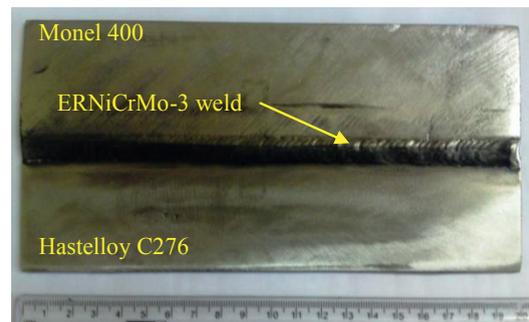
Photograph of the as-welded samples of Monel 400 and Hastelloy C276
